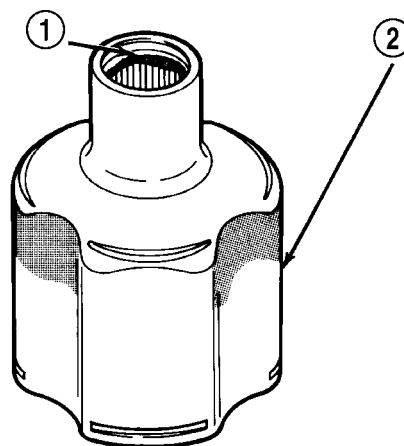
Tripod Joint Retaining Circlip And O-Ring Seal
